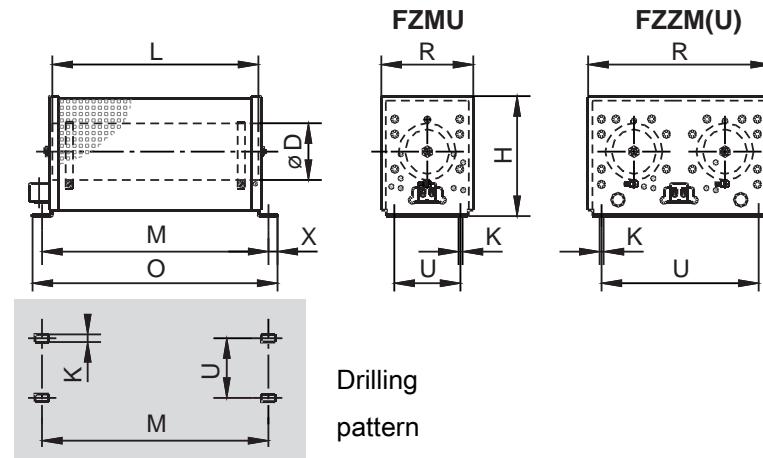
FZMU, FZZMU 400×65 dimensional drawing
